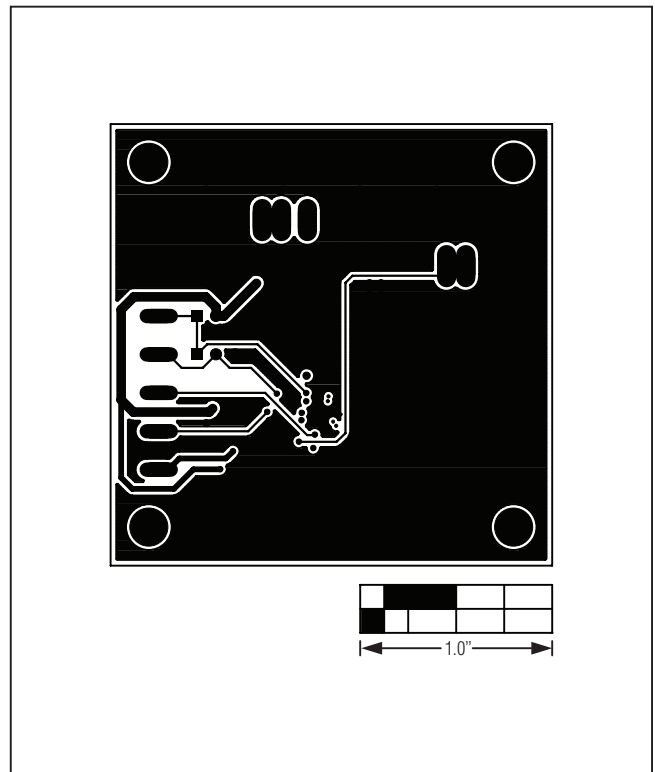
MAX15108 EV Kit PCB Layout—Inner Layer 3
